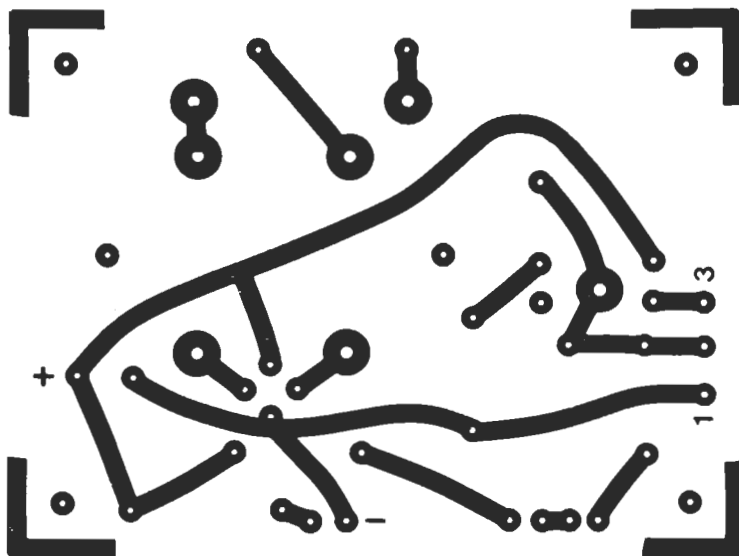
Etching and drilling guide for pc board is below; component placement at right.
